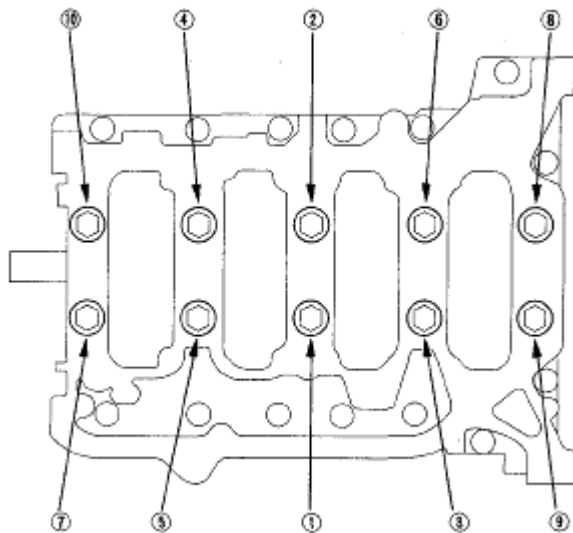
Identifying Bearing Cap Bolt Tightening Sequence
